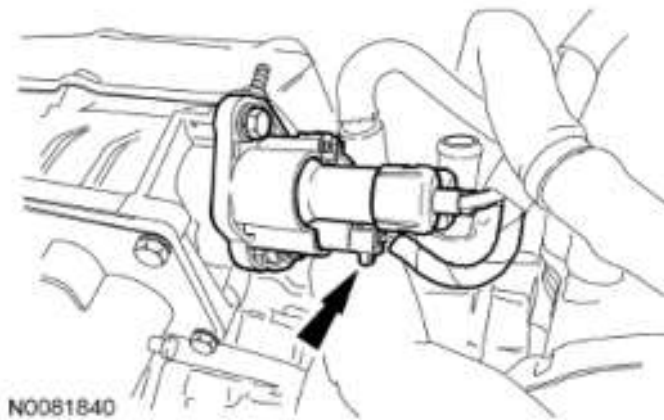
Locating High Voltage Wiring Harness Electrical Connector
